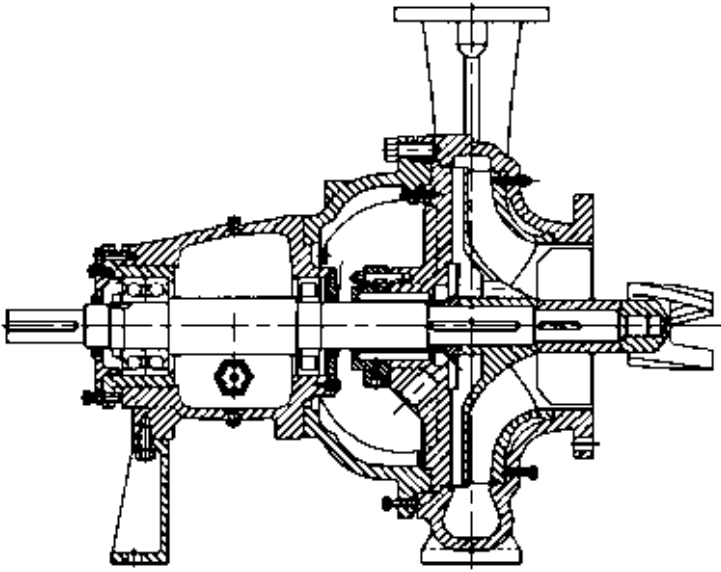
Medium consistency stock pump. (Courtesy ITT / Goulds Pumps, Inc.)
